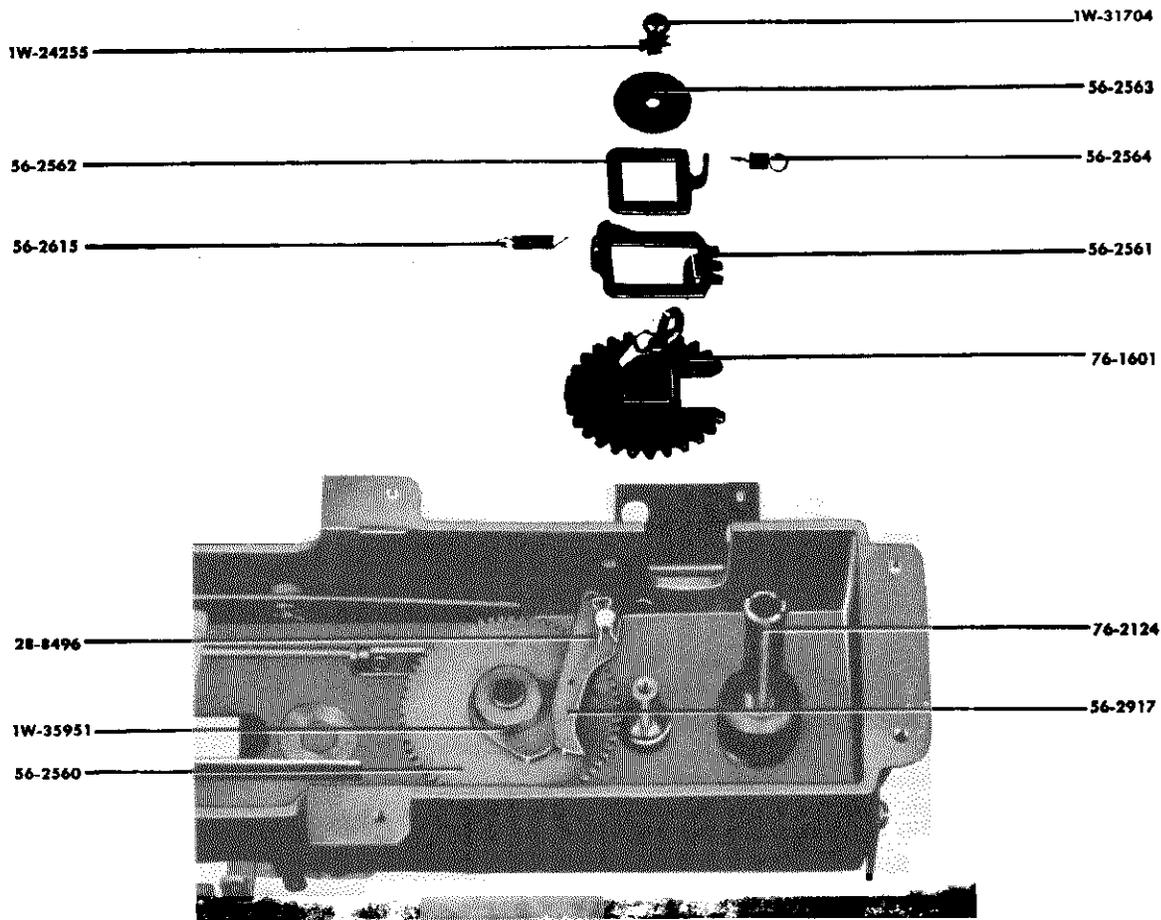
CHANGER MECHANISM, DISASSEMBLY OF INTERMEDIATE GEAR.
